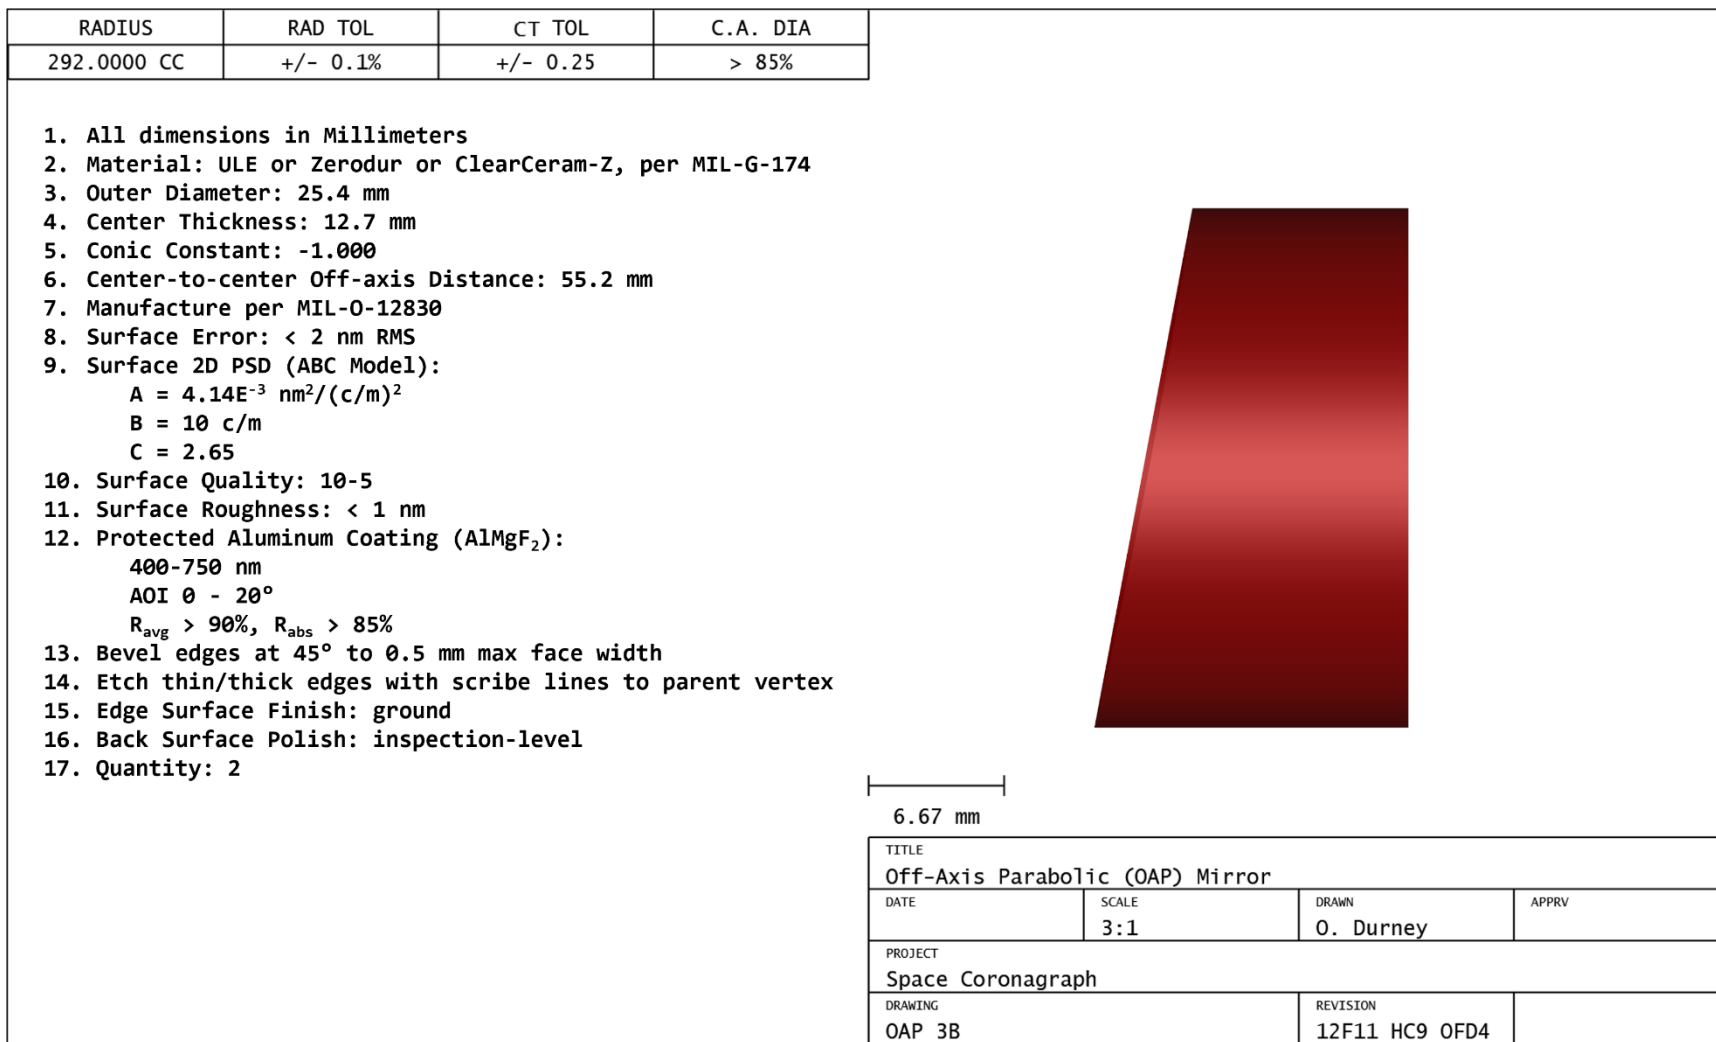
Off-axis parabolic (OAP) mirror 3B drawing
